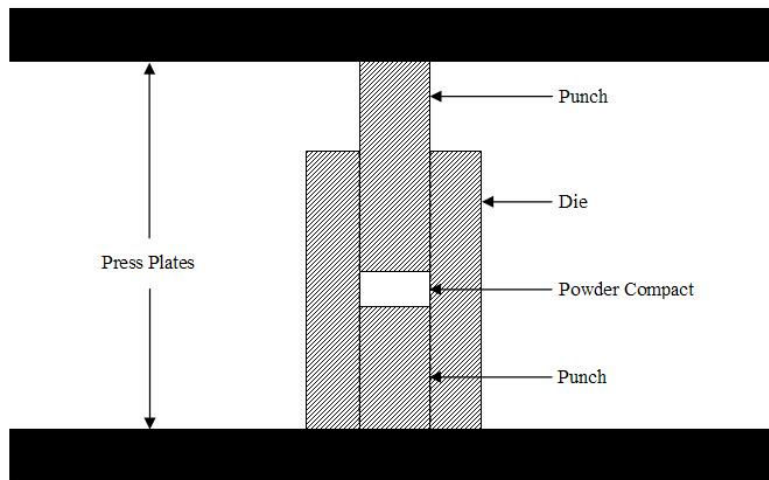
Setup for uniaxially pressing a powder compact using a punch and die set.
